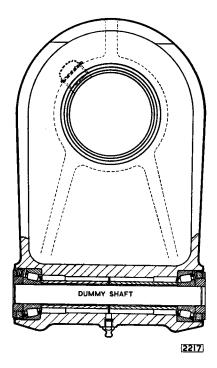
Showing the dummy shaft in position in the hub carrier.
